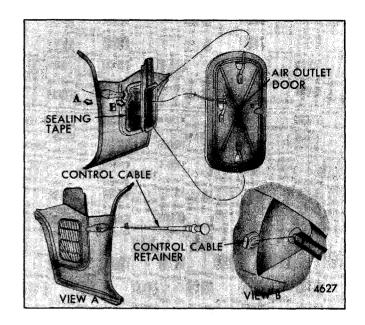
Shroud Side Duct Air Outlet and Door
